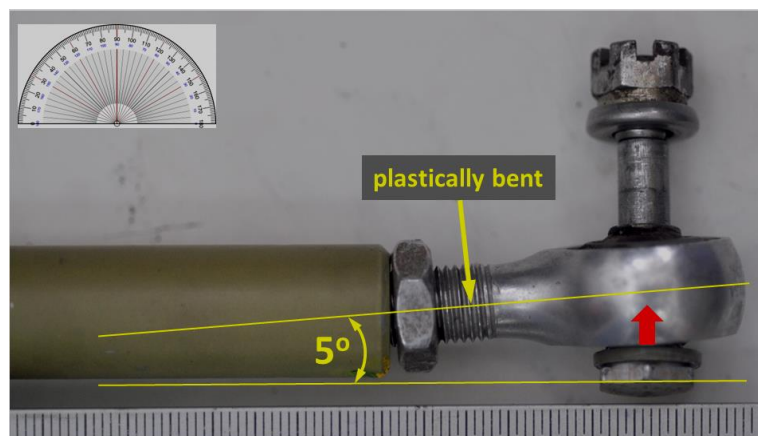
Illustrated bend measurement of the rod end bearing with the push rod
